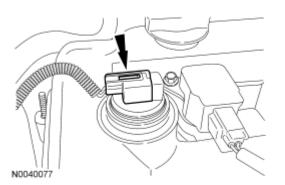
Locating Variable Camshaft Timing (VCT) Solenoid Electrical Connector Courtesy of FORD MOTOR CO.
